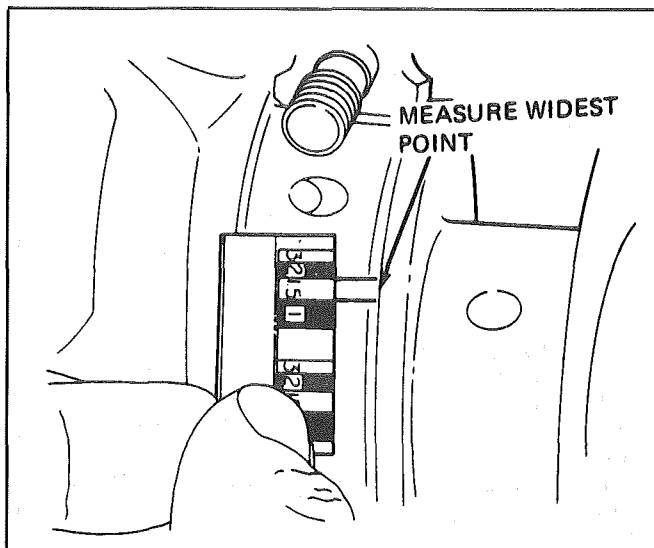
A3-36 Measuring Gaging Plastic-Typical
